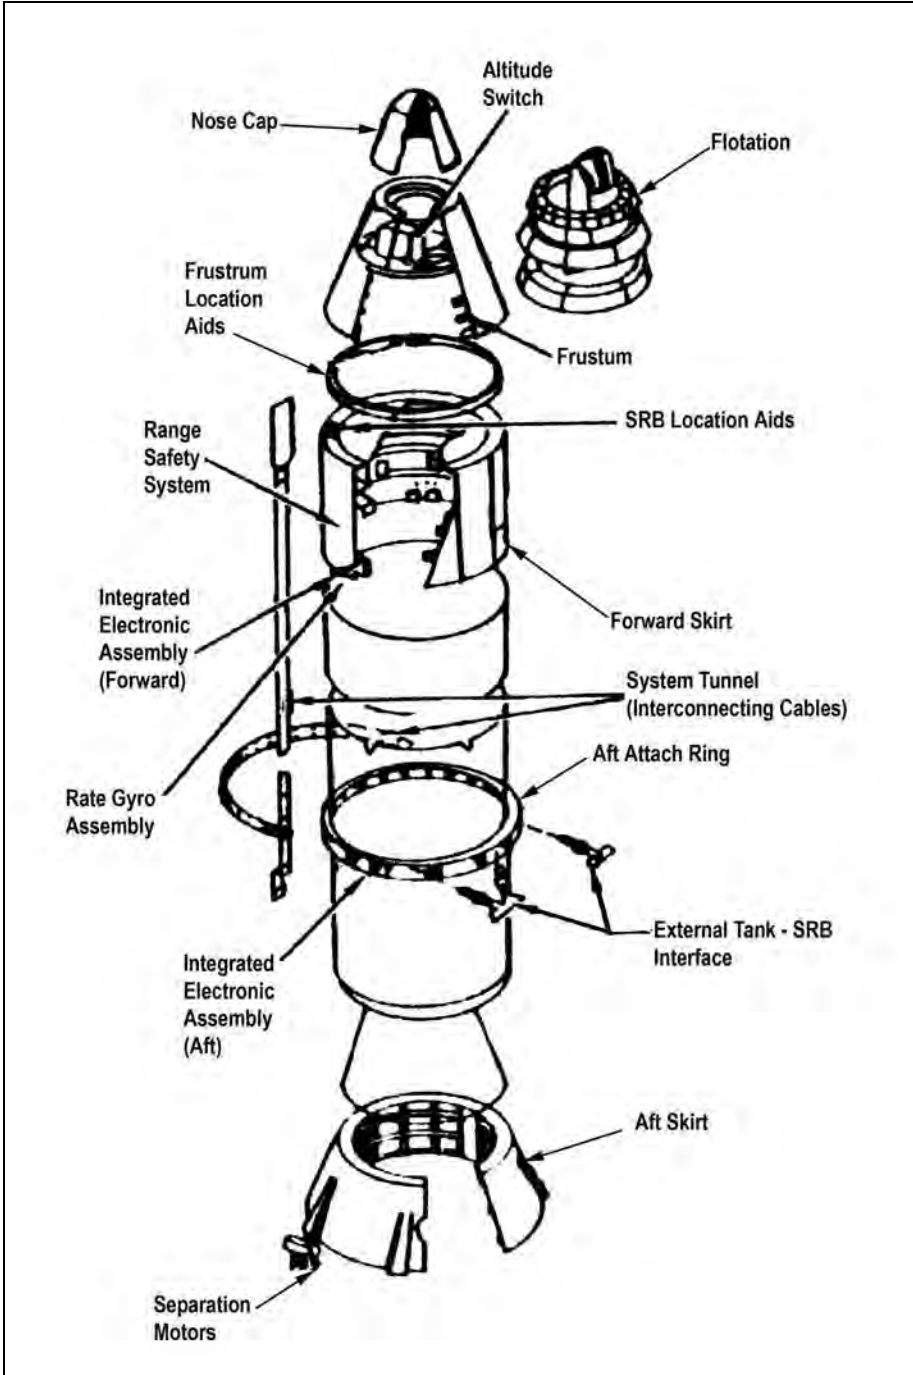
Exploded View of Space Shuttle Solid Rocket Booster.
